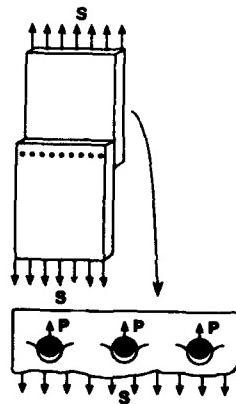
Fracture mechanics analyses of multiple-site cracks.
